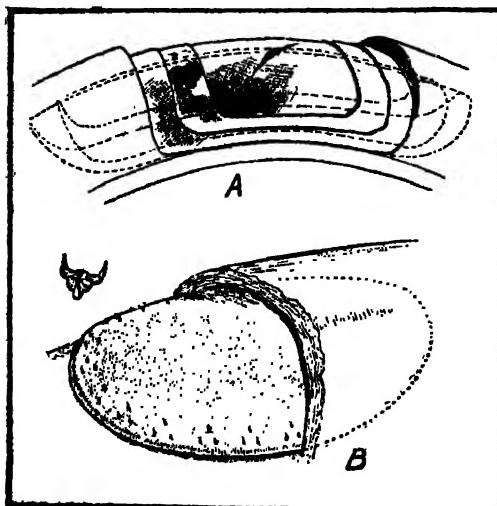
At A, Method of Stepping Down Fabric and Tread of Outer Casing when Repairing Blowout by Sectional Vulcanizing Process. At B, an Inside Patch that is Held in Place by Mechanical Means Instead of Cement is Shown.
